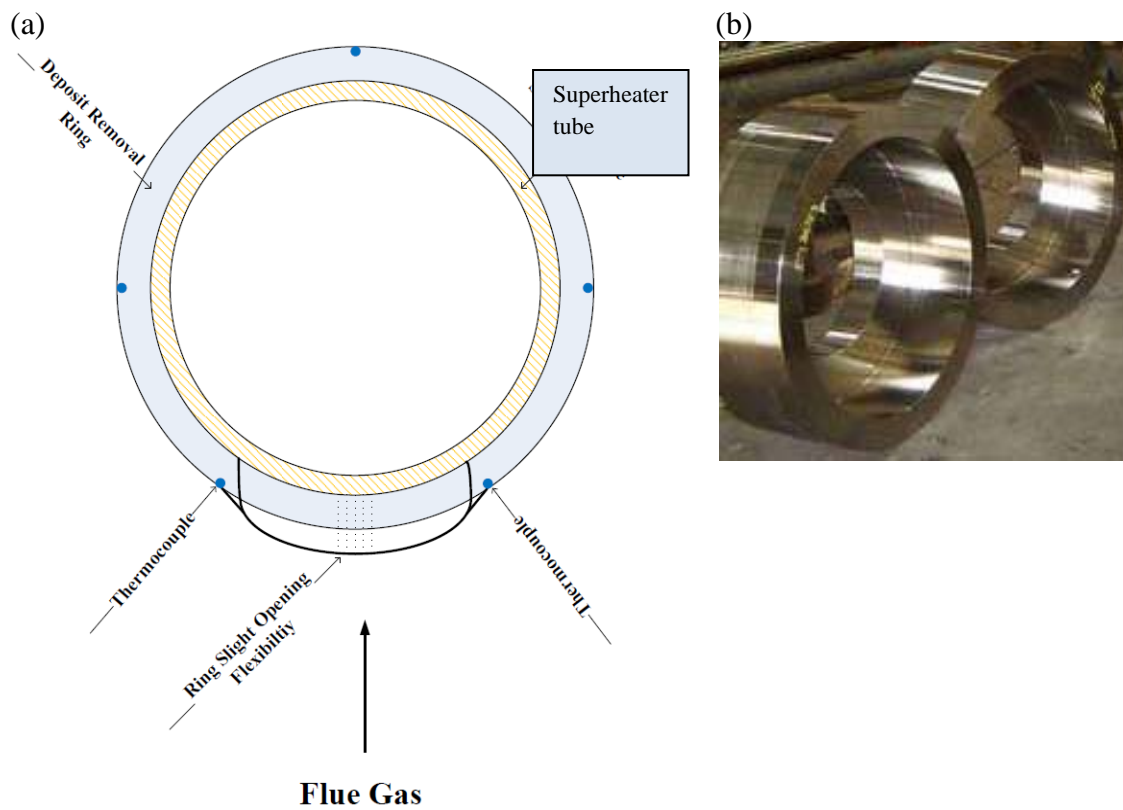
2: a) A schematic layout of the ring for deposit removal on a superheater tube, b) a potential ring that can be used with modifications.
